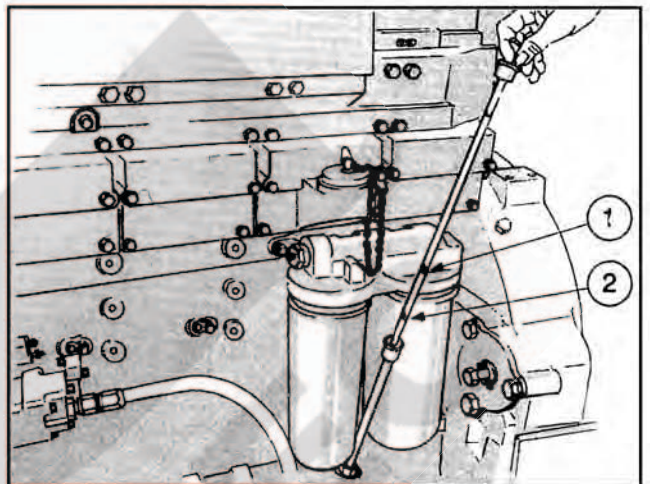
, (OM1005L). Checking engine oil level — KT/KTA19
